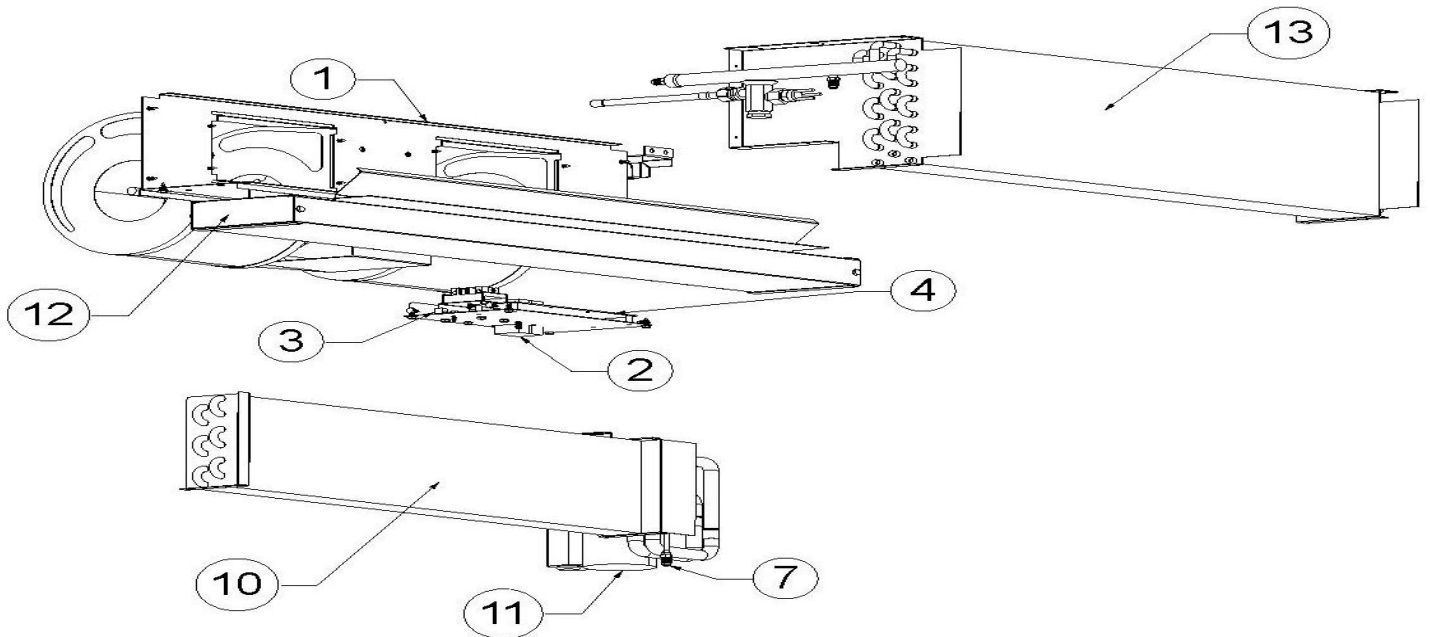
SDXW/ CDXW/ SCWW/ CCWW 34-35 Hydronic Heat Air Handler Unit Repair Parts Schematic W/ Constant Torque Blower Motor
